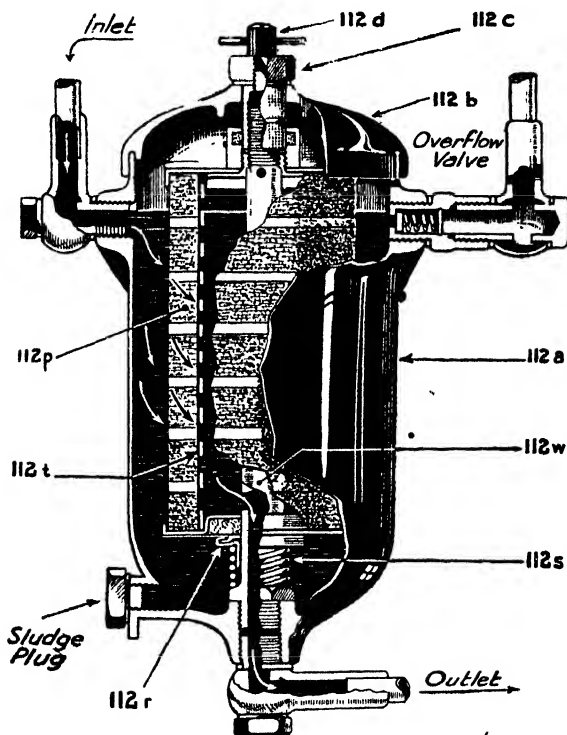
The Bosch Felt Element Fuel Filter, Type BFA11P.
